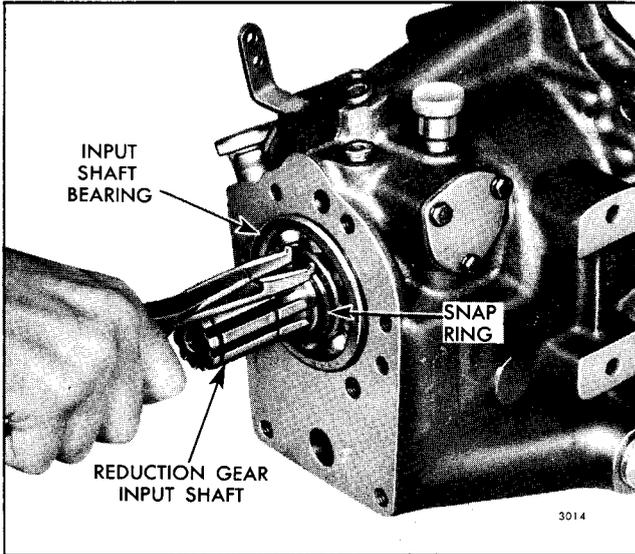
Removing or Installing Reduction Gear Input Shaft Bearing Snap Ring (2.5:1 and 3:1 Ratios)
